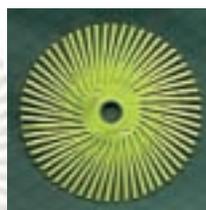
Incorrect position of the disc when mounted on the mandrel assembly. Note the disc fingers are angled against the direction of the grinder rotation.
